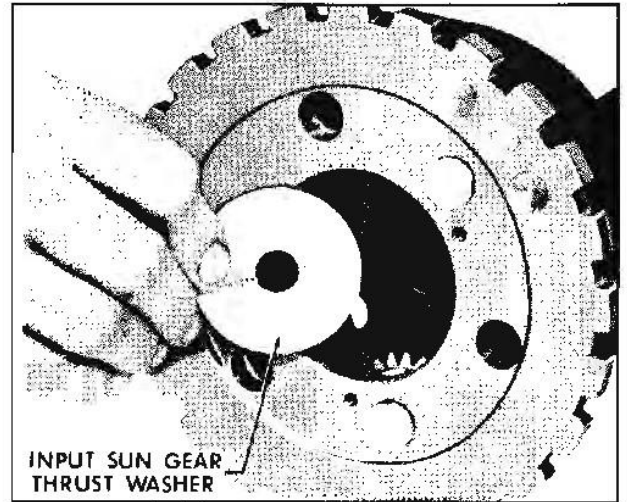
B-95 Installing Input Sun Gear Thrust Washer
